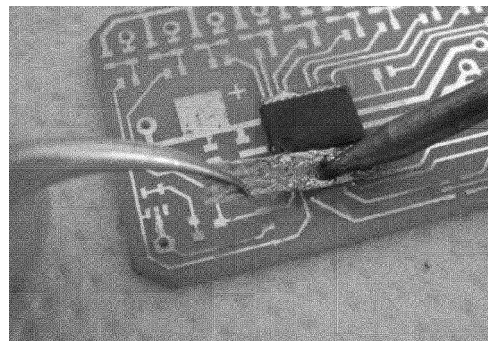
Use desoldering braid to remove all the excess solder between pins.
